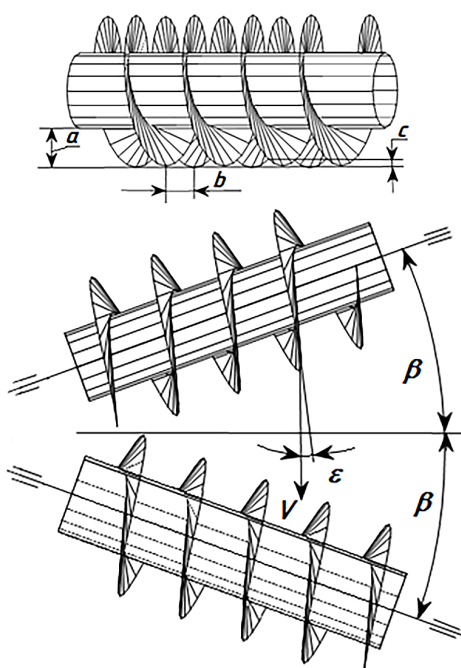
Soil tillage tool in projections, which consists of two screw working bodies
